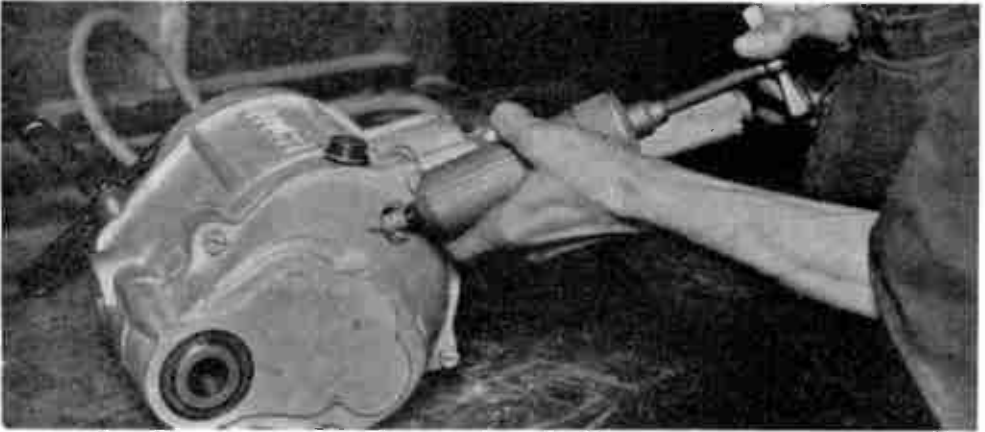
INSERTING GREASE IN THE GEAR CASE.
